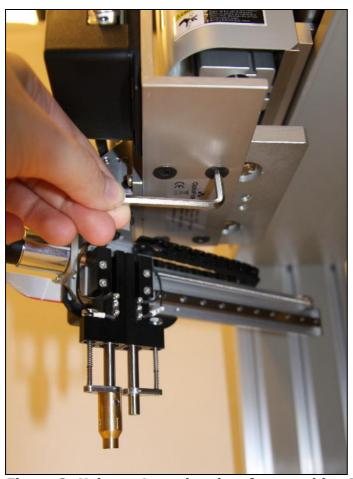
Using a 4 mm hex key for attaching TwoFinger actuator to robot head
